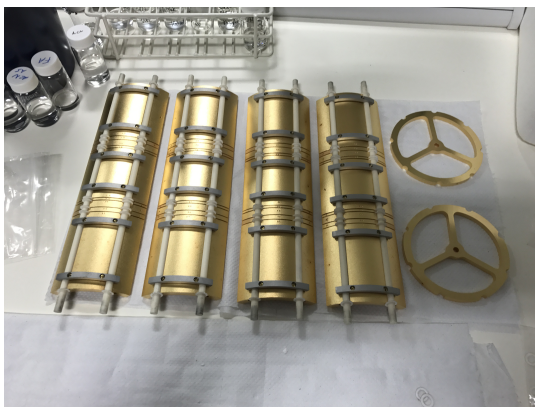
Details of the final assembly of the ICR-cell. The four “sides” of the cell, aligned and clamped to the ceramic rods (left) and the inner trapping rings (right). Care is necessary when assembling the different parts, in order not to damage the ceramic rods and not to scratch the thin layer of gold/nickel on the plate surfaces.
